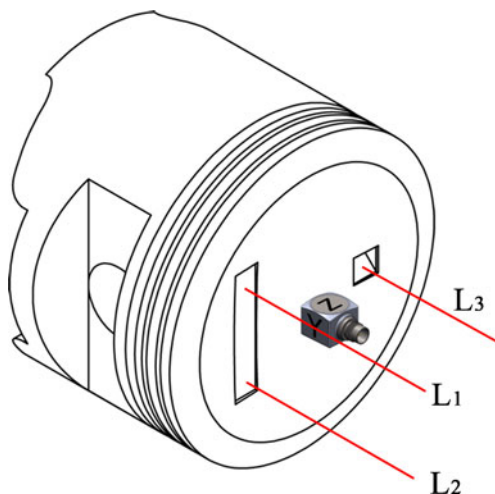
Machining flat slot and 45° slope profile on piston crown and location of the mounted triaxial accelerometer
